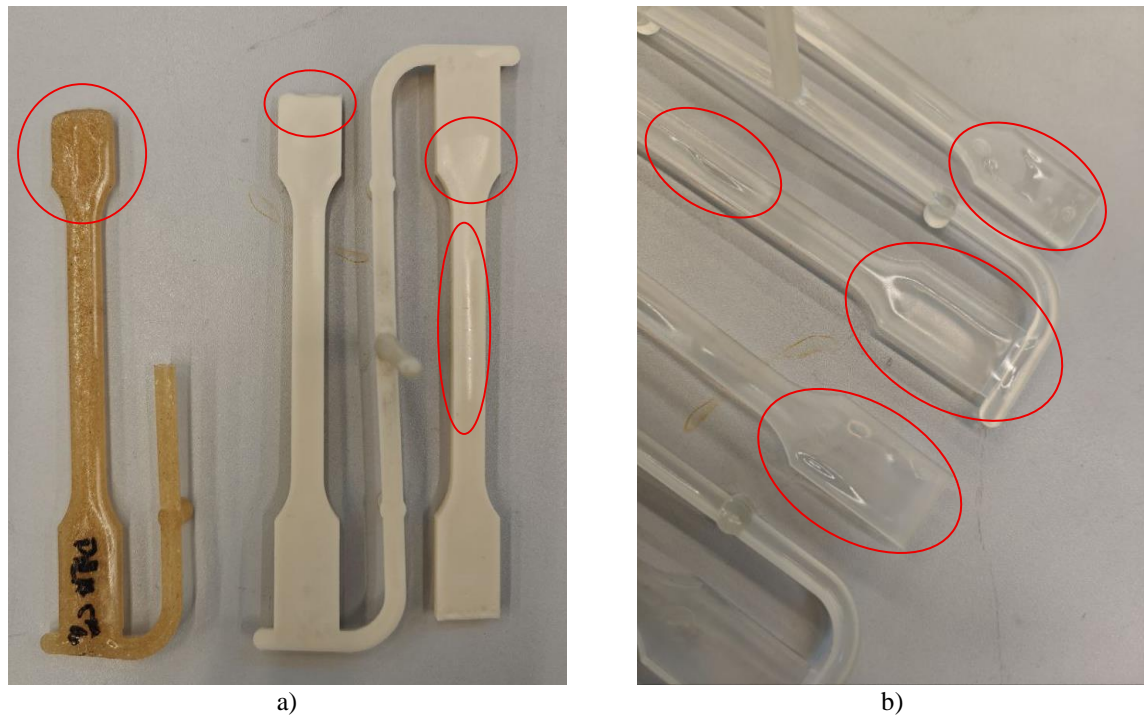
Examples of defects observed in the early stages of injection molding: a) incomplete specimens with missing end sections of the paddles: on the left, PLA containing 5 wt% wood fibers (only one side is present because the connecting runners between specimens occasionally broke during ejection from the machine) and on the right, a specimen produced from neat PHB, b) a specimen made of neat PLA, showing an uneven, wavy surface resulting from inadequate injection parameters
